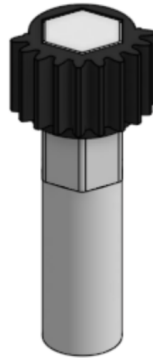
Half spur gear glued onto the auger motor shaft adapter.
